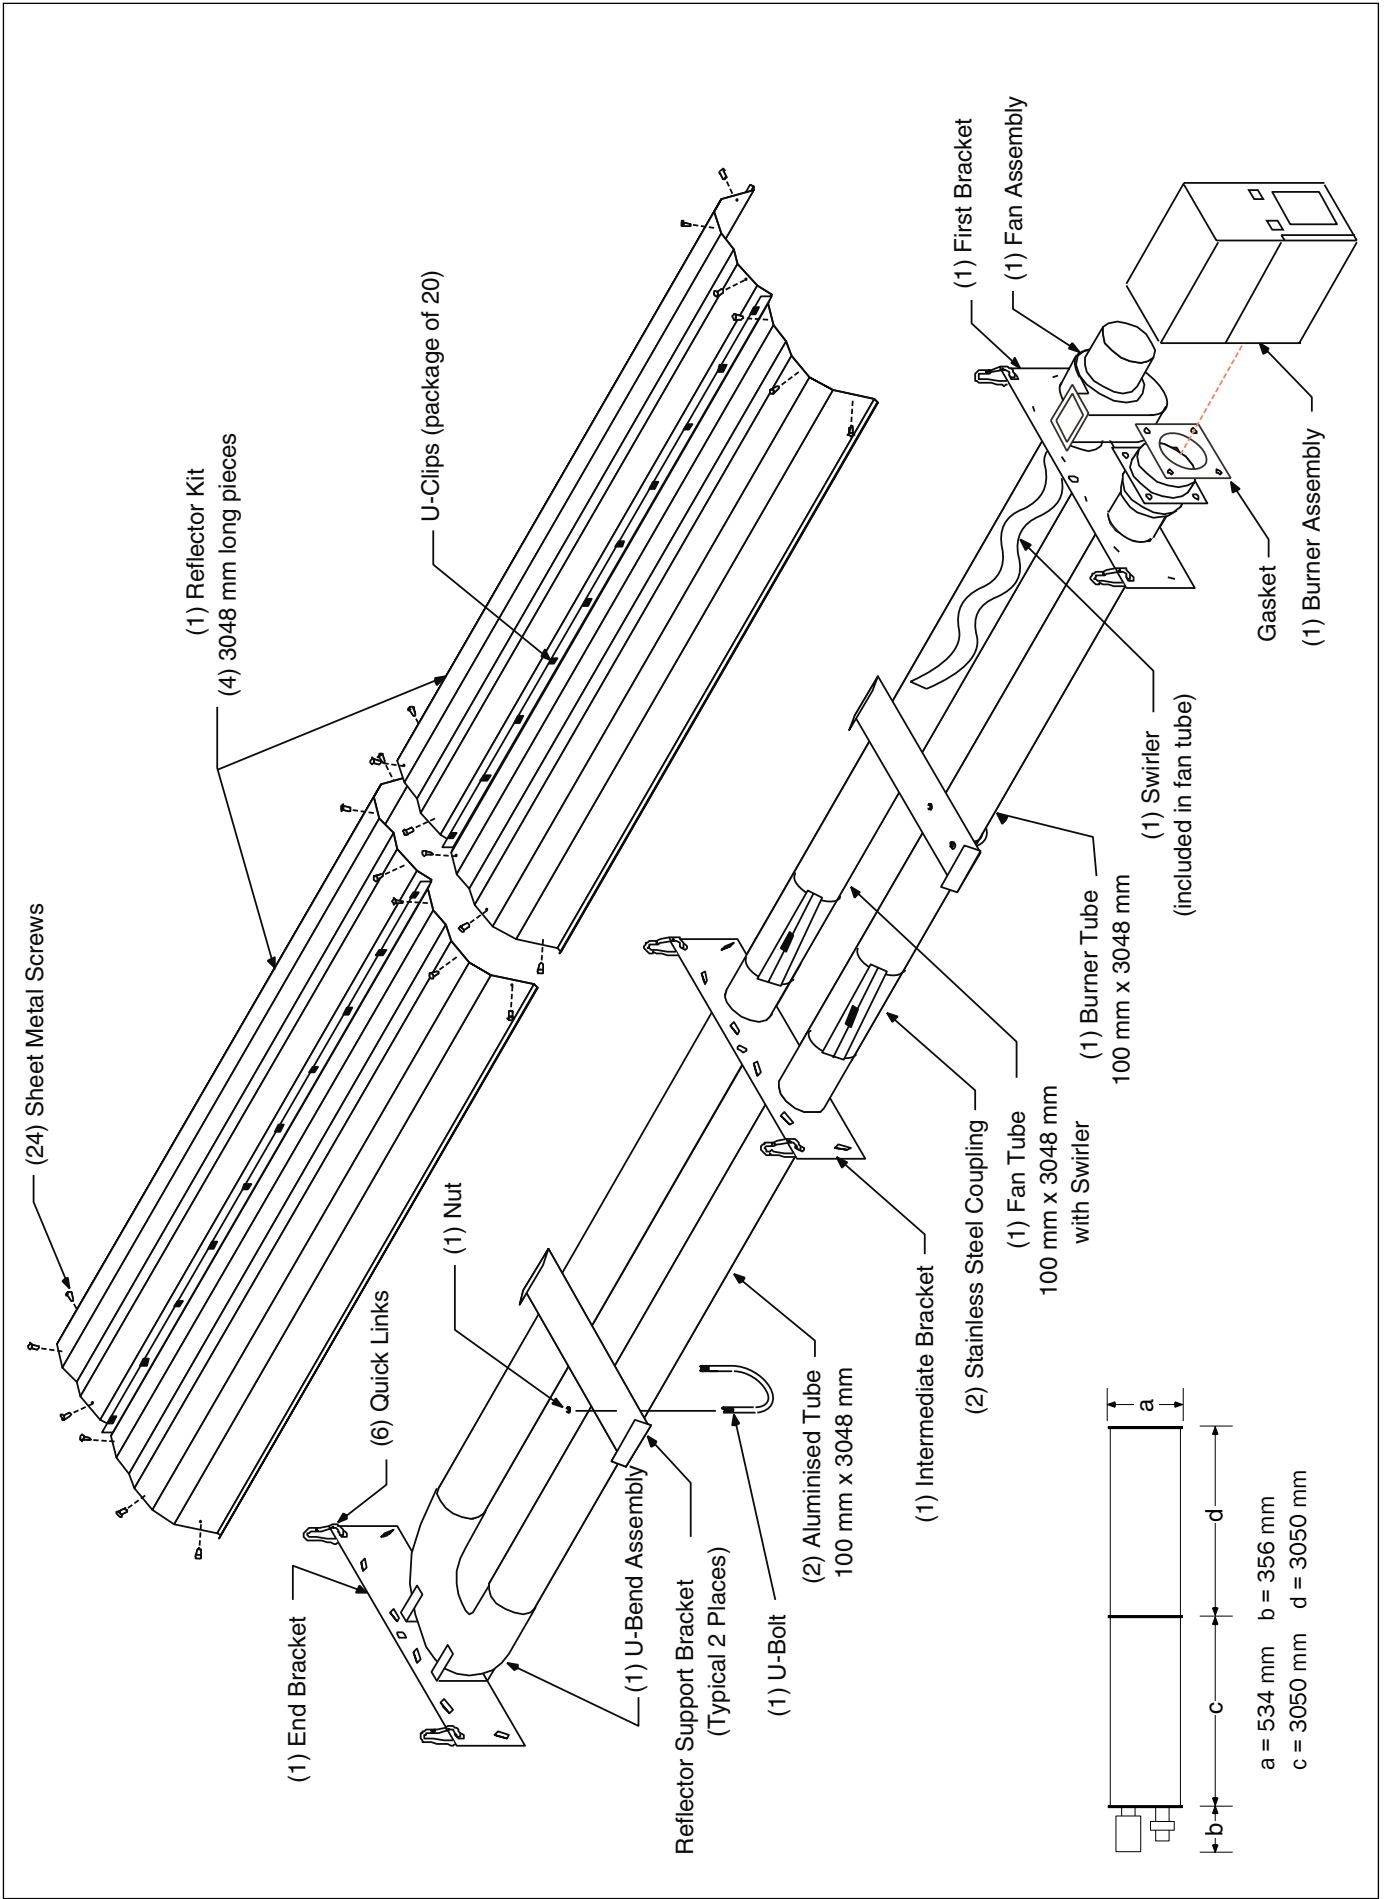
Model BH30UT/BH35UT/BH40UT U-Tube Assembly
